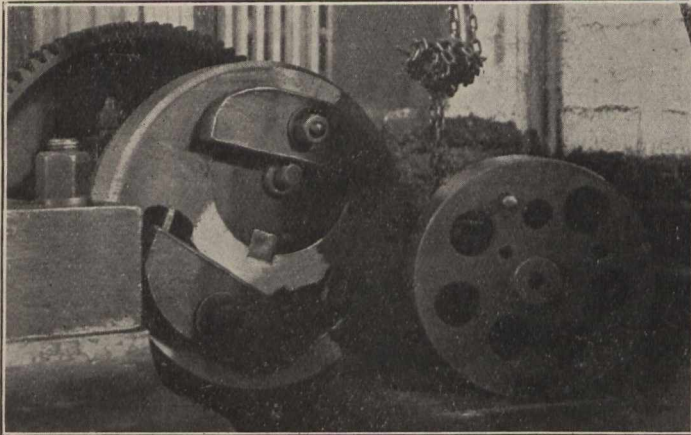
Turning an Eccentric Sheave on Special Mandrels.
